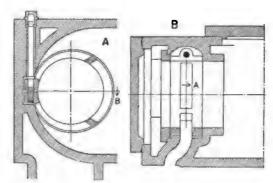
The McIntosh & Seymour Adjustable Valve-bushing.
